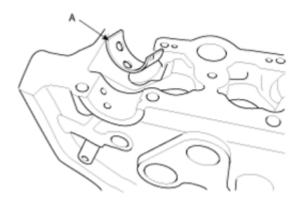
Identifying Exhaust Camshaft Lower Bearing Courtesy of KIA MOTORS AMERICA, INC.
